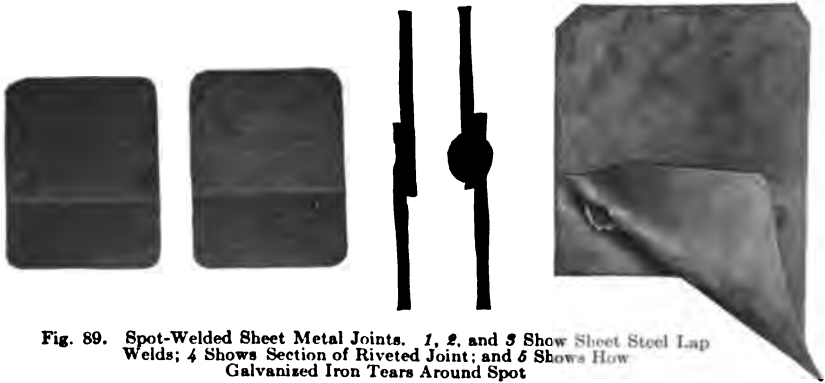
Spot-Welded Sheet Metal Joints. 1, 2, and 3 Show Sheet Steel Lap Welds; 4 Shows Section of Riveted Joint; and 5 Shows How Galvanized Iron Tears Around Spot
